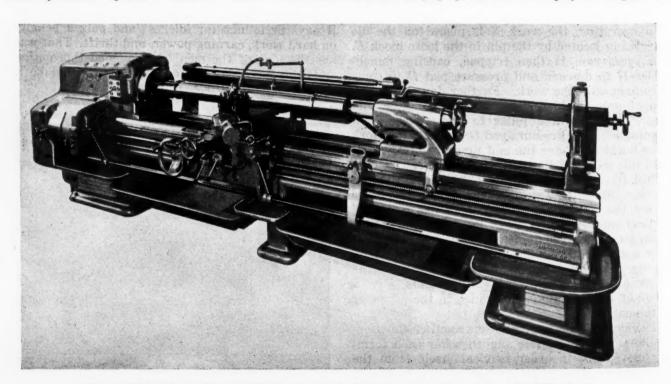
Hydraulically Operated Duplicating Lathe Brought out by the American Tool Works Co.
